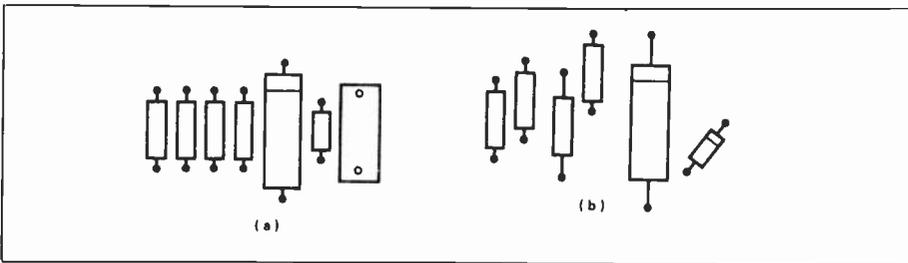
Component spacing and layout. The right way (a), and the wrong (b).
